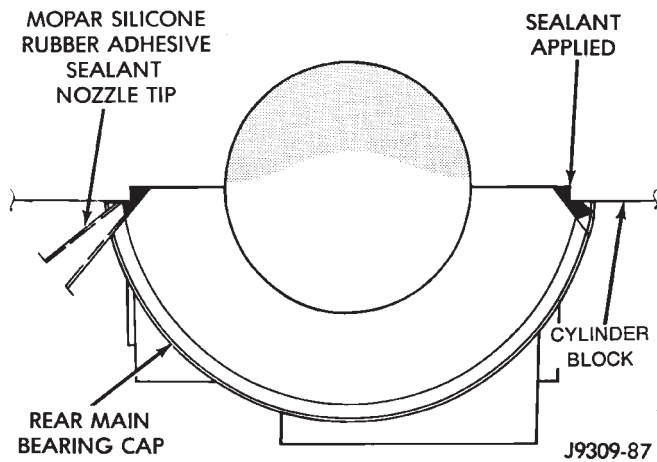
Apply Sealant to Bearing Cap-to-Block Joint
